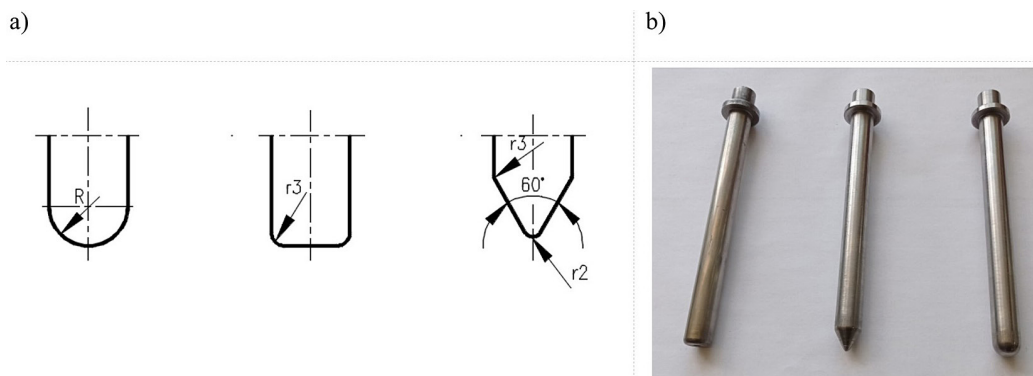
Punches used in experiment: a) shape and dimensions, b) view
